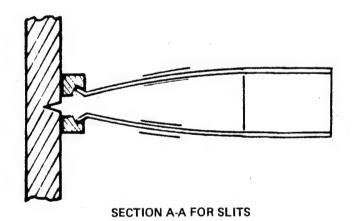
Clip Gage Installation on Test Specimens Containing Defects
